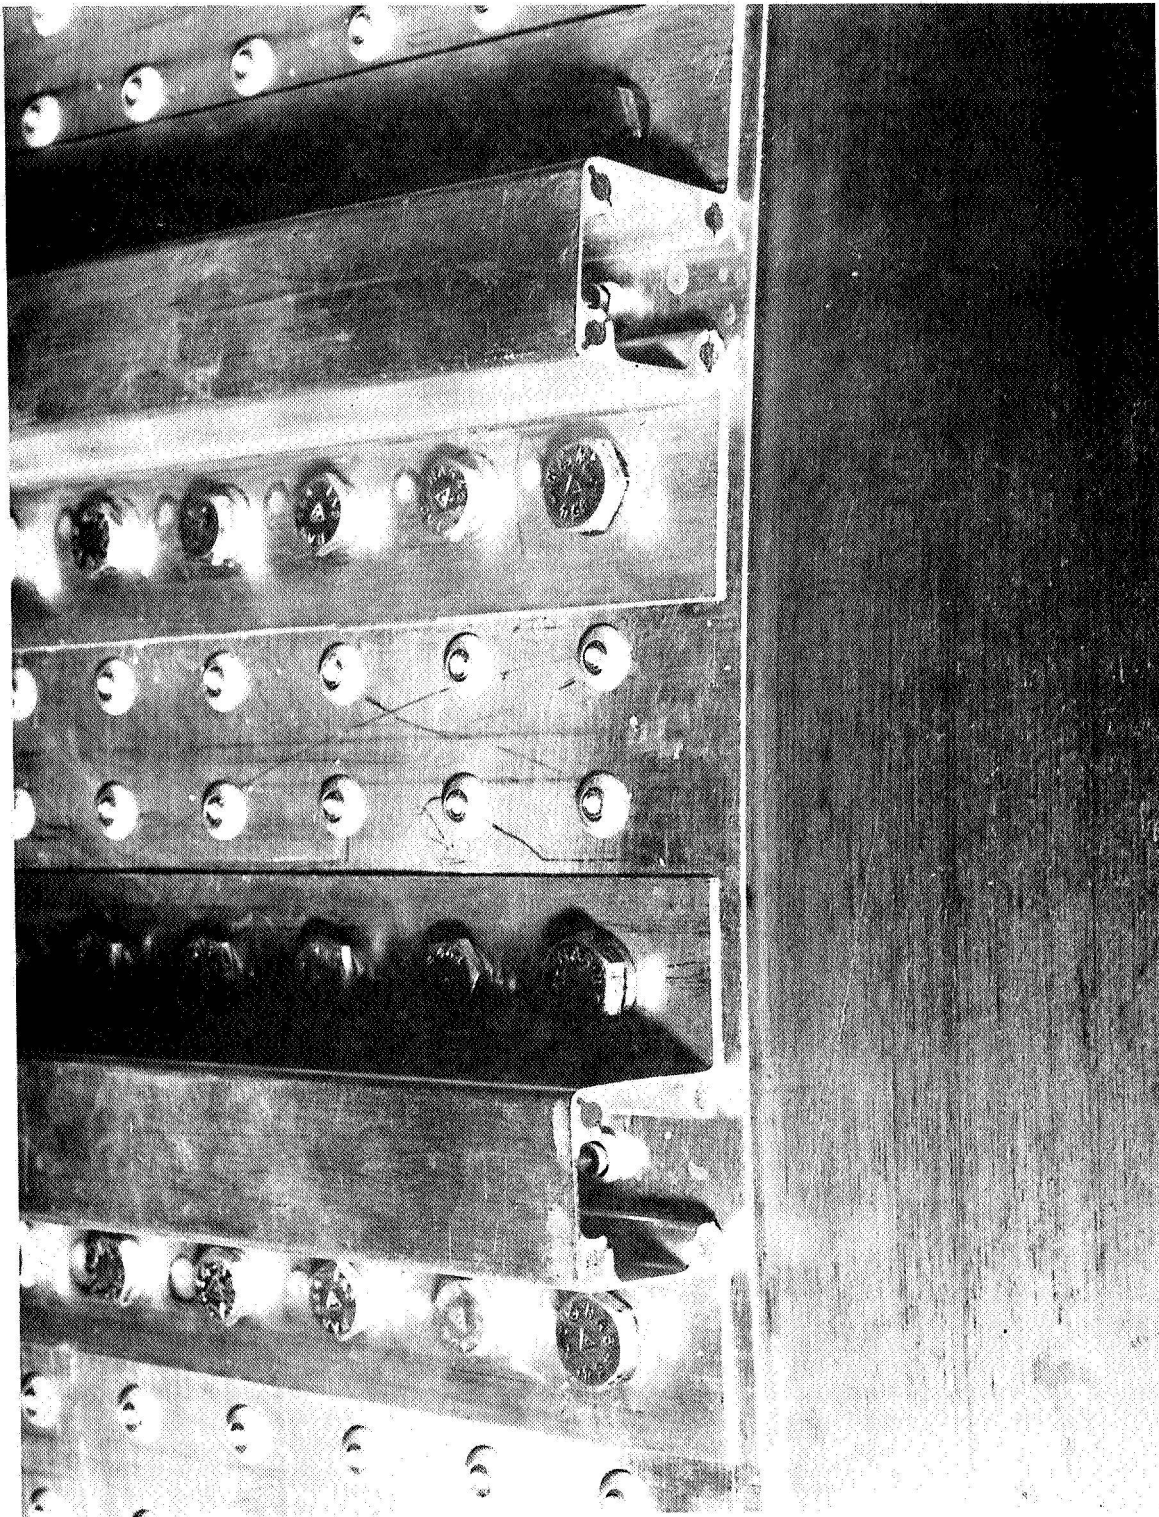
VIEW ON END OF REINFORCED STRINGERS
